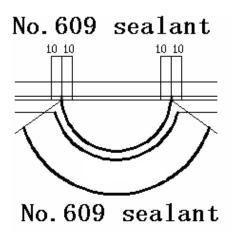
The front and rear sear sealing surfaces of cylinder head cover
